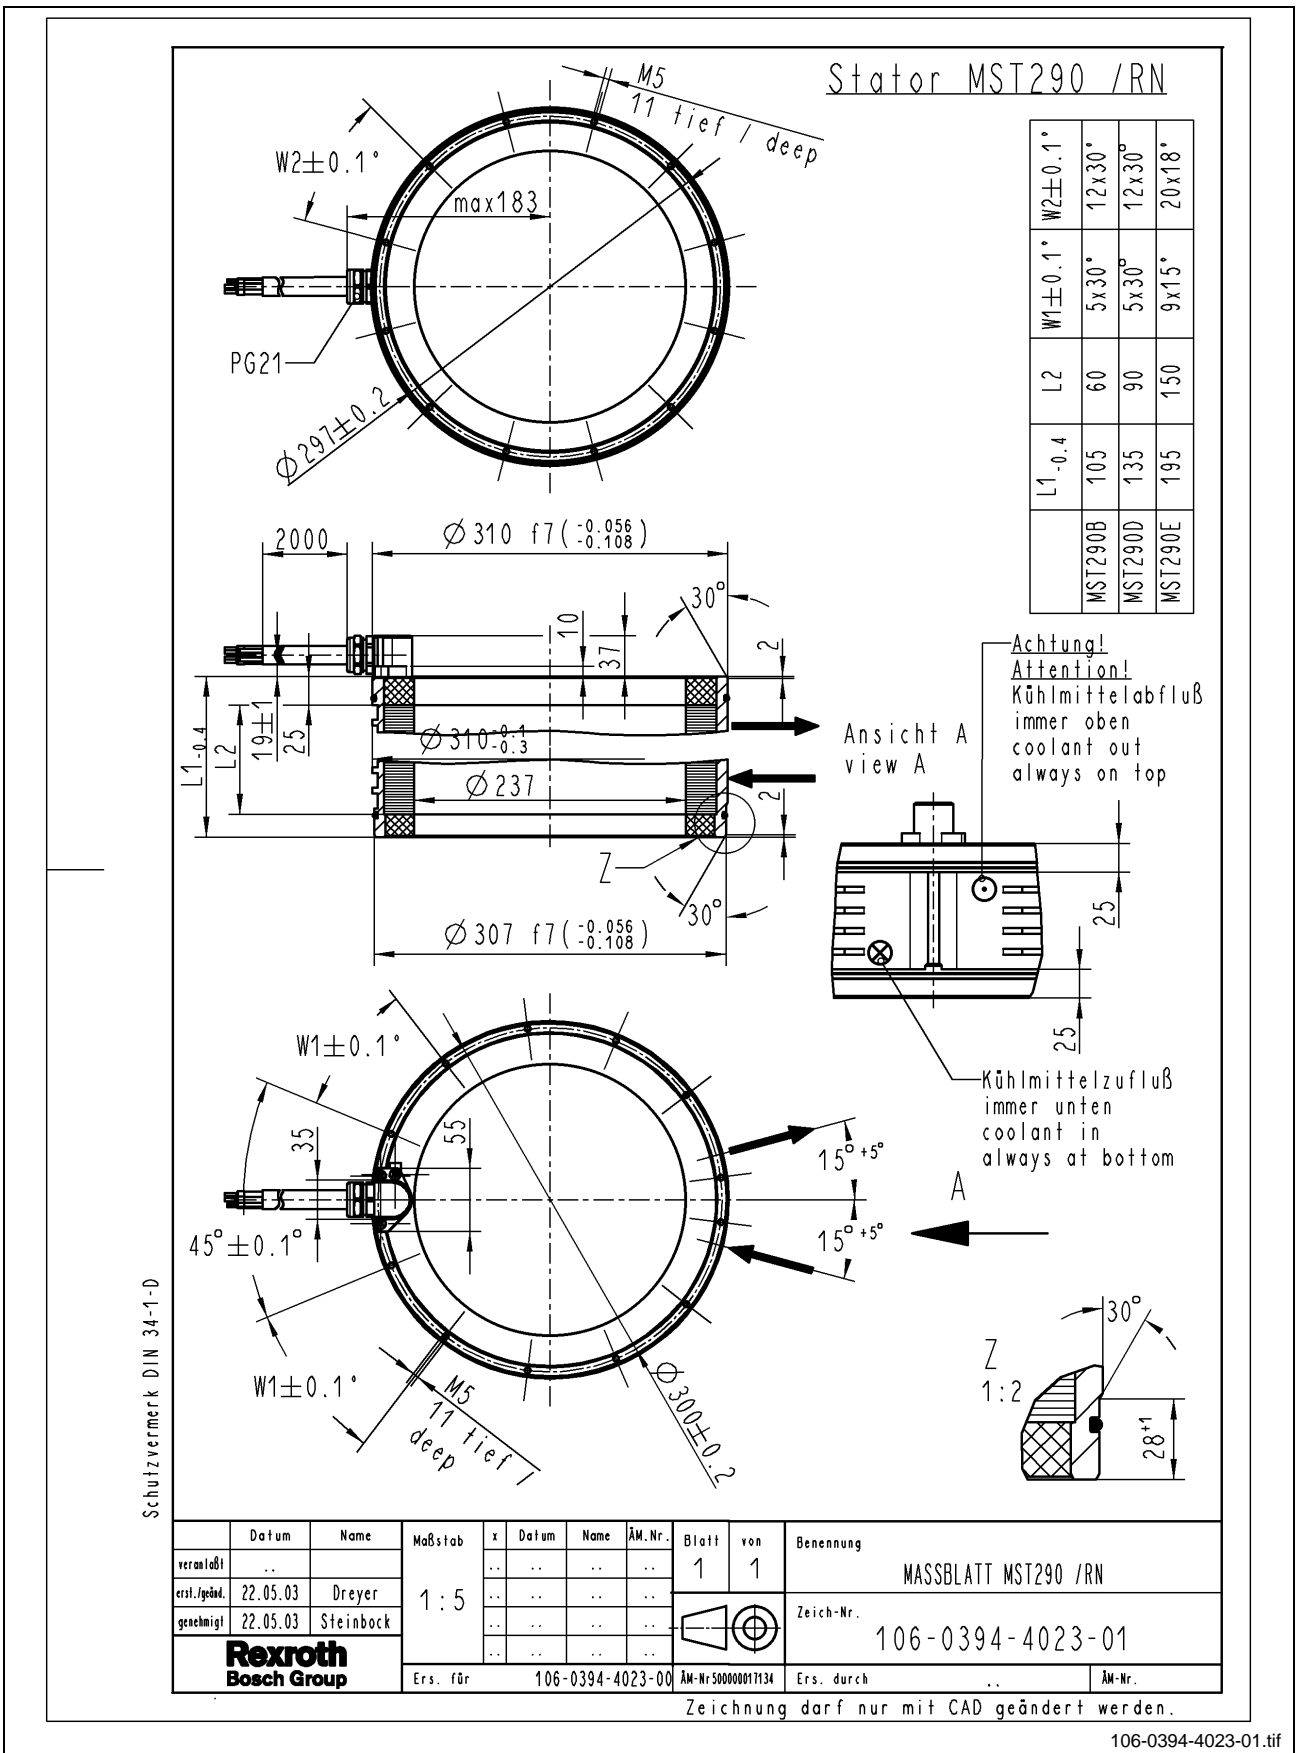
Dimension sheet MST290, electrical connection "RN"
